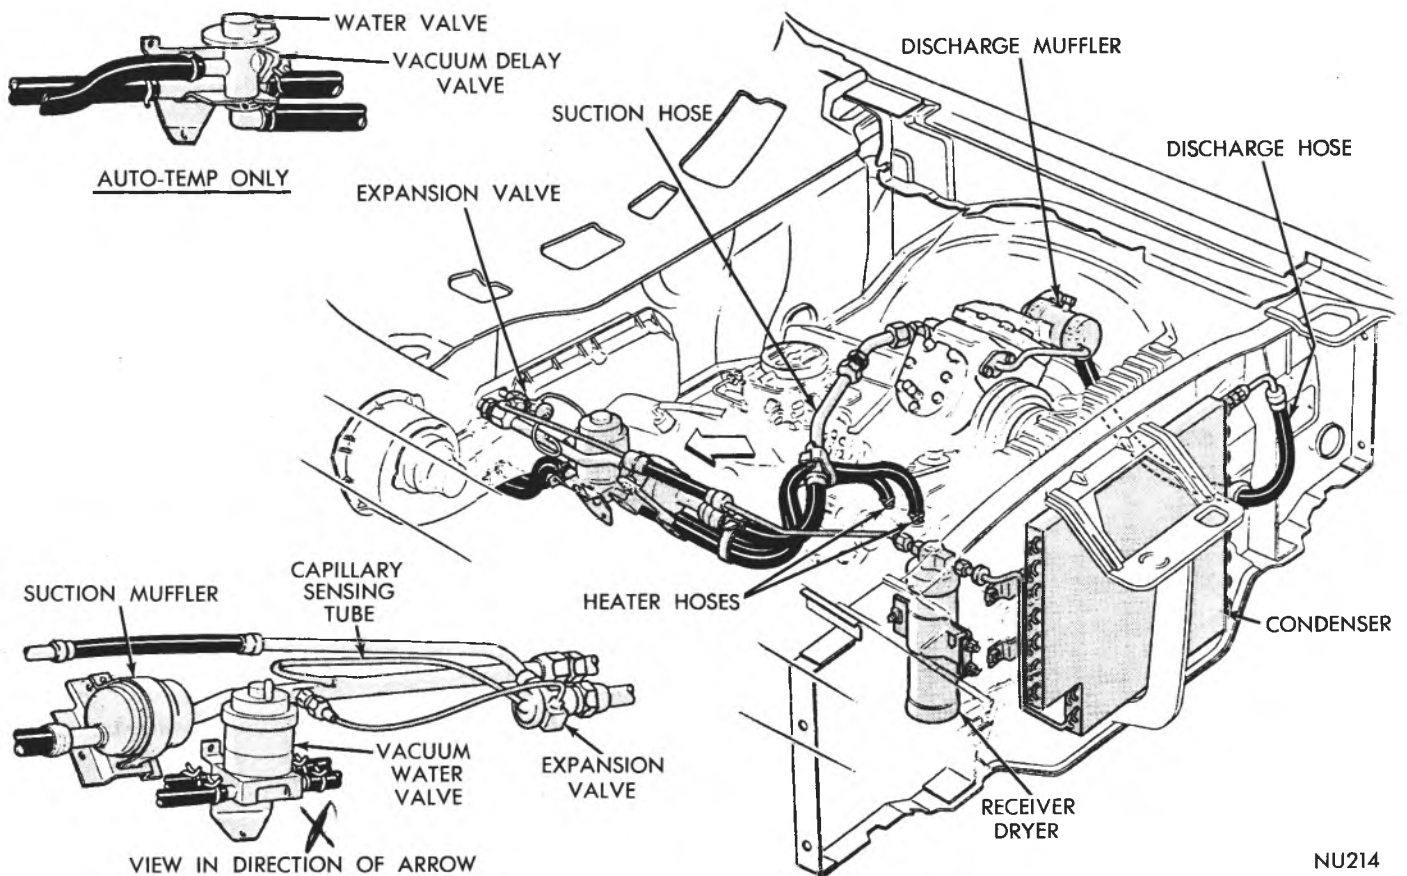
Air Conditioning and Heater Plumbing (383-440 Engines)
